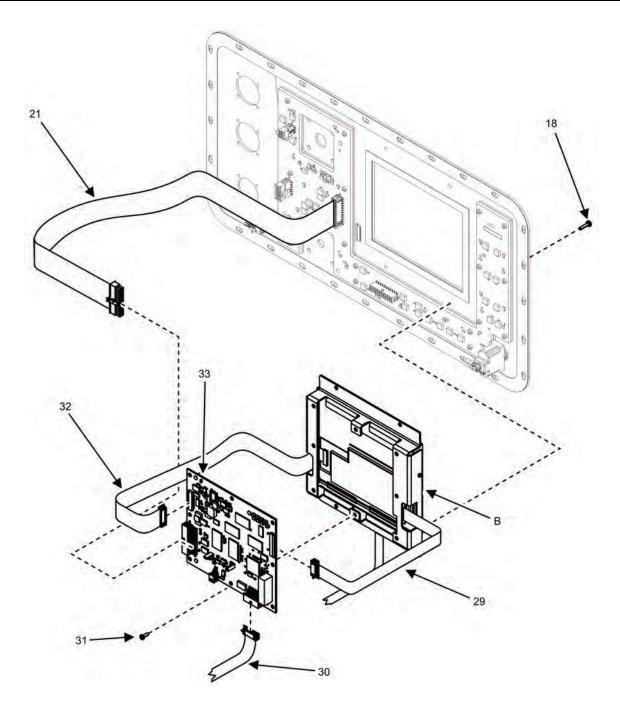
DCS Control Panel Assembly (Sheet 5 of 6).
